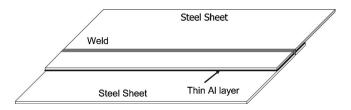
Schematic diagram of weld coupon assembly for lap welding.
